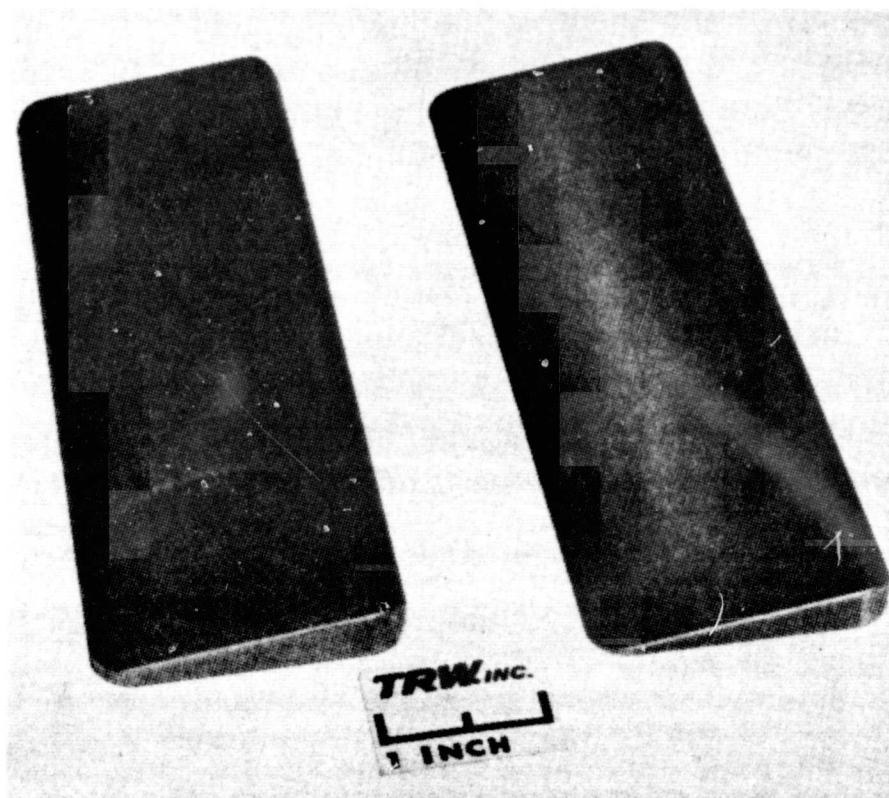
Steel Cores to be Used to Produce Cavity in Hollow Diamond Blade Specimen (1.900 Wide, 5.800 Long. Radii: Left 0.062/0.170, Right 0.015/0.155).
